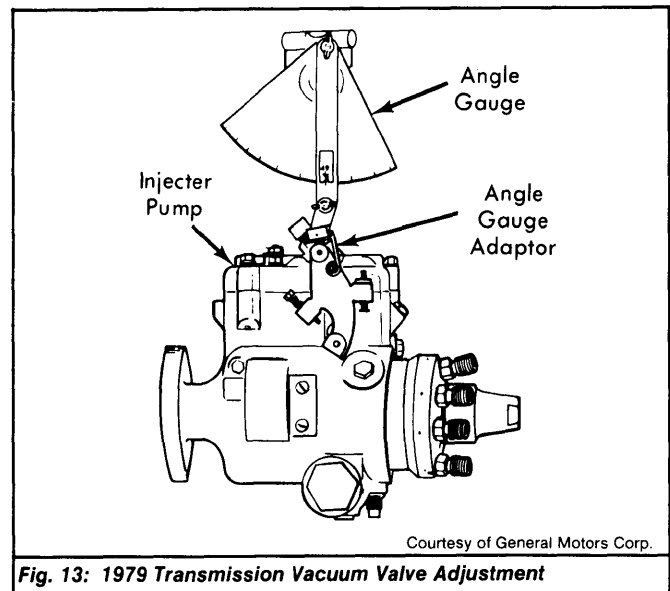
1979 Transmission Vacuum Valve Adjustment
